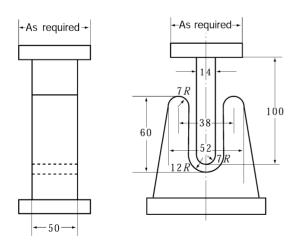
Guided Bend Test Jig (For 3.2 mm in thick., Unit: mm)
